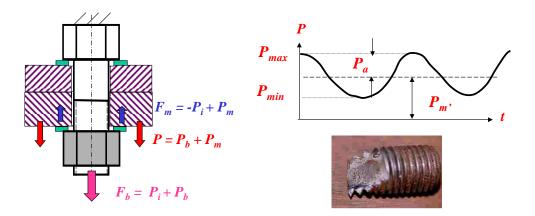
Variable loading, the applied tensile load is varying. Bottom right, an example of bolt fatigue fracture.
